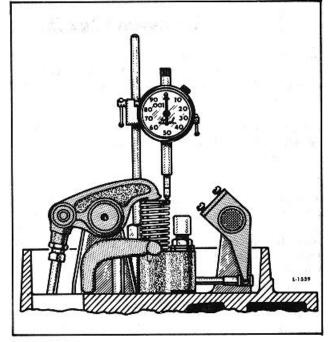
Checking Engine Timing By Measuring Injector Depression
